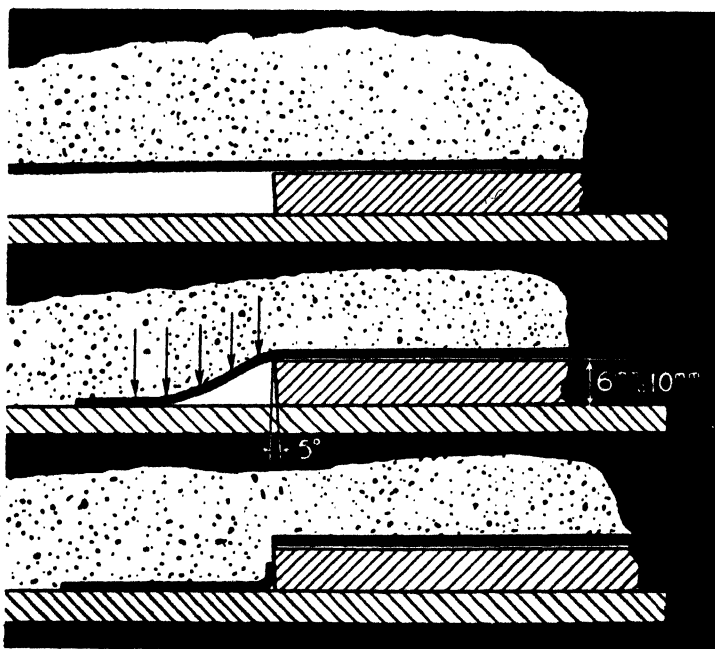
Rubber tool for punching sheets .028 inch thick.
